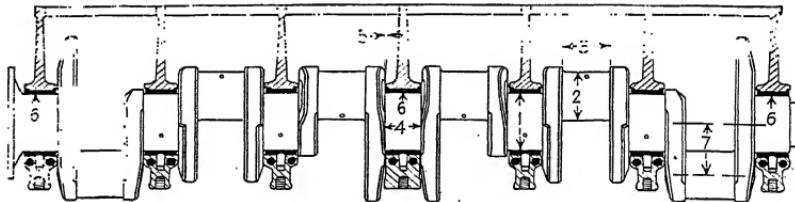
Crankshaft fits and clearances. See Table 4.
